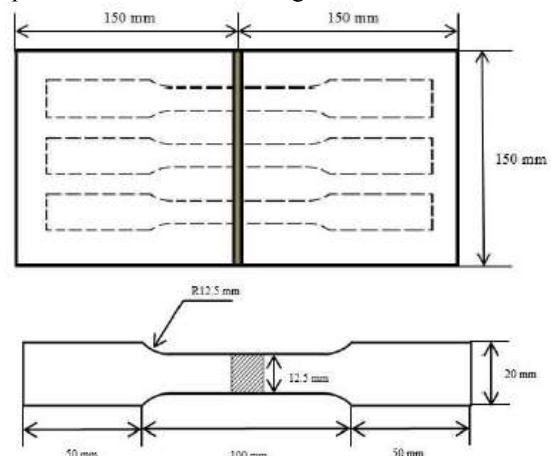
Schematic diagrams for dimensions of specimen for tensile test
